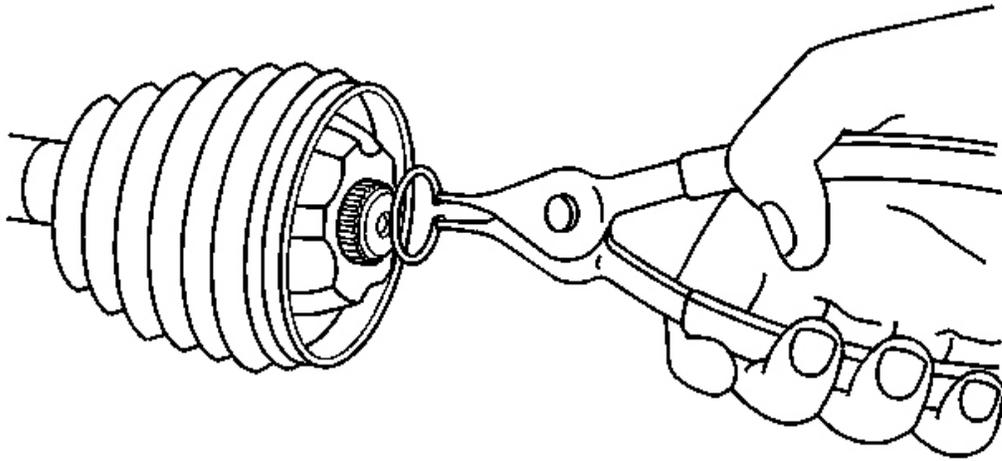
Removing/Installing Axle Shaft Snap Ring
